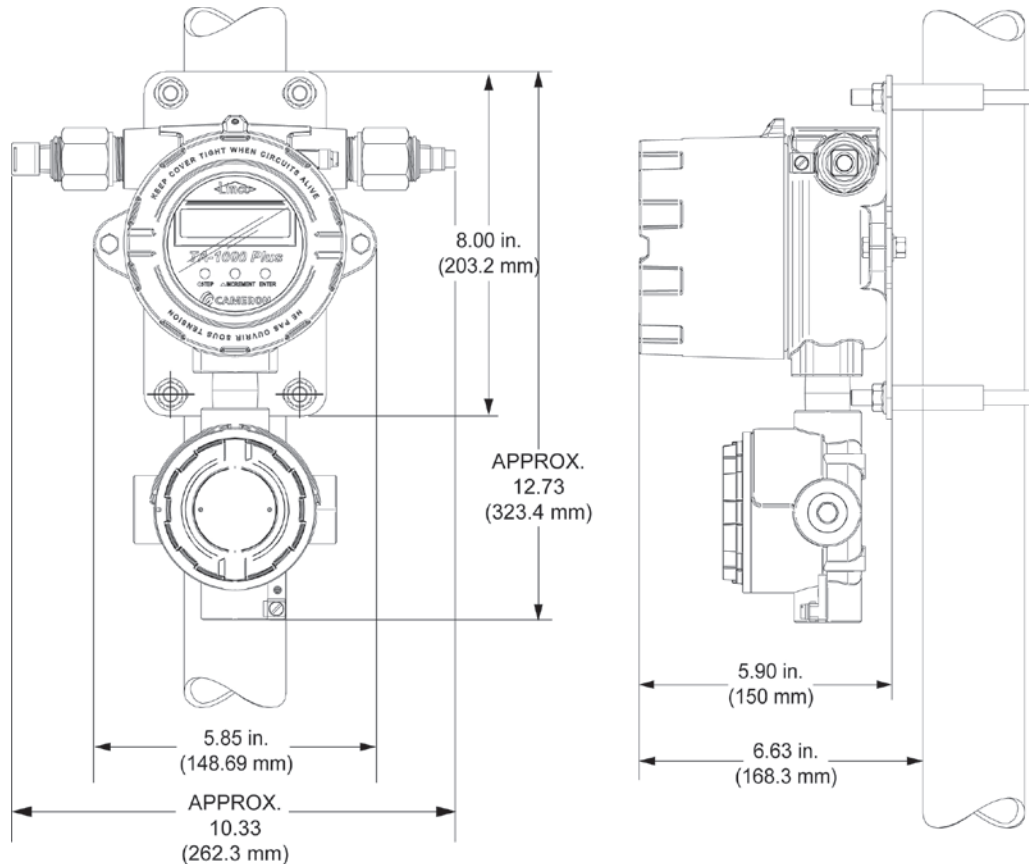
Typical explosion-proof package dimensions for pole-mount installation
